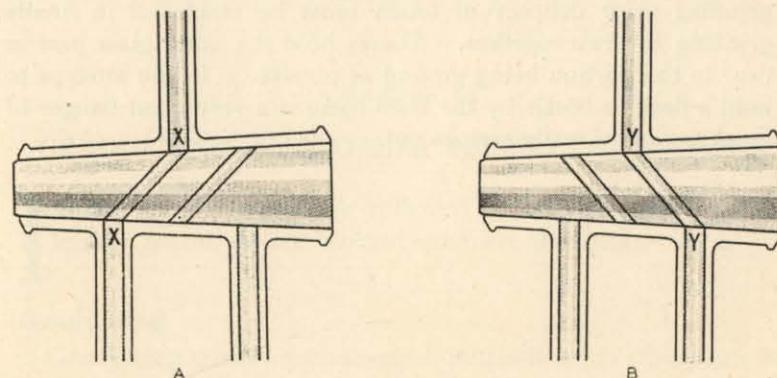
METHOD OF MARKING AND CHECKING THE DRILLING OF AN OBLIQUE-BORE KEY
